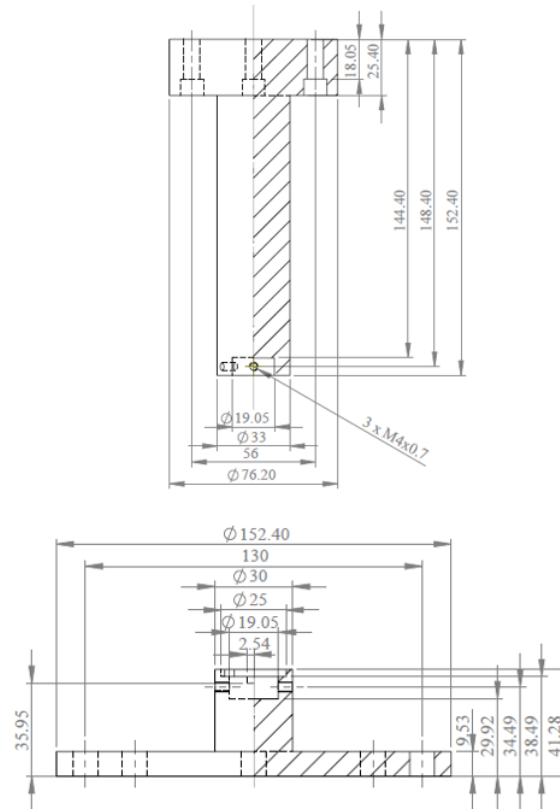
9 Schematic view of upper and lower die holders (all dimensions are in mm).
